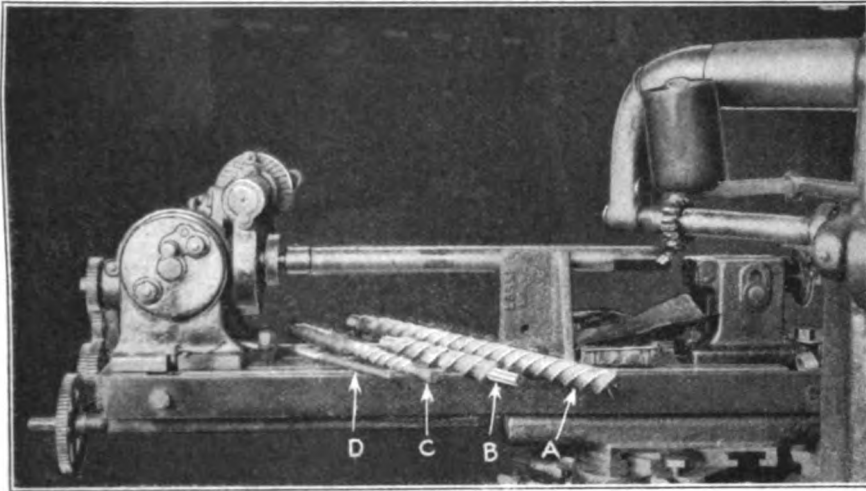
MILLING FLUTES IN SPIRAL CUTTERS
